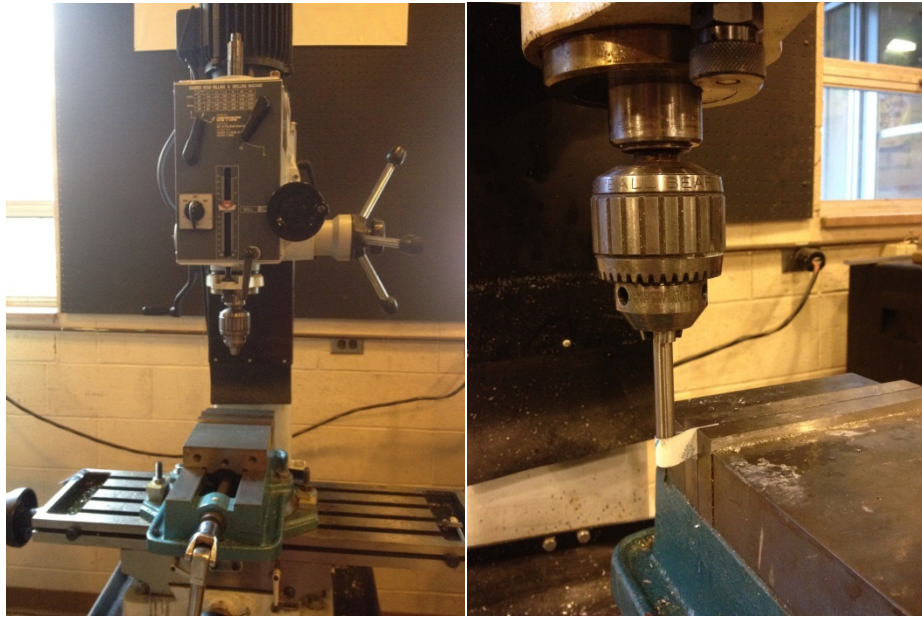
(a) Geared Head Milling & Drilling Machine; (b) polishing setup
